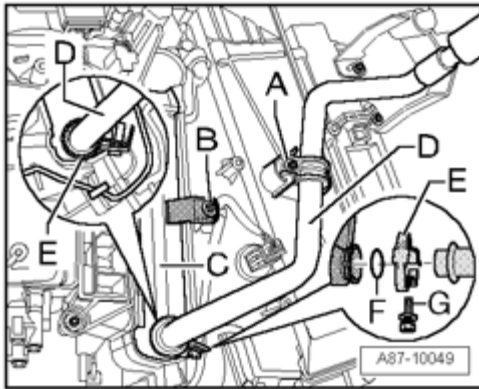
Identifying Holders, Coolant Pipe, Heater Core, Bolt, And Clamp
